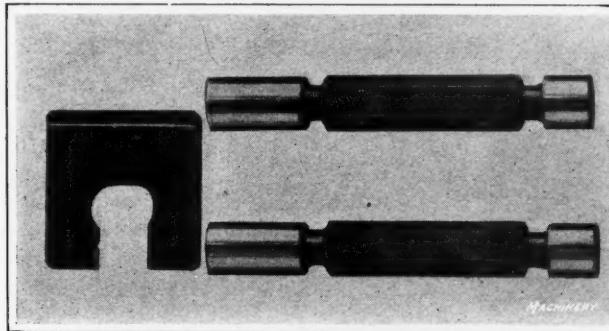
Working and Inspection Plug Gages with Reference Snap Gage
